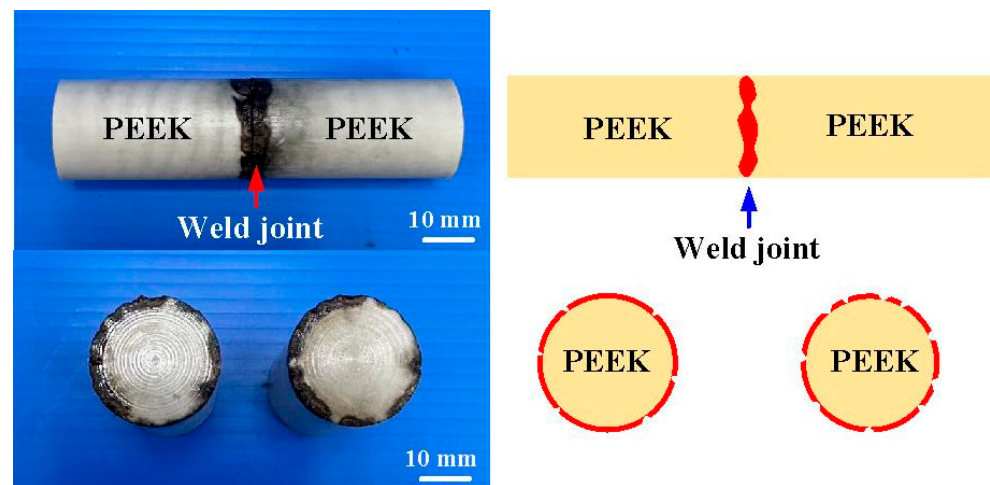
A typical welded part for laser welding of PEEK polymer rods.
